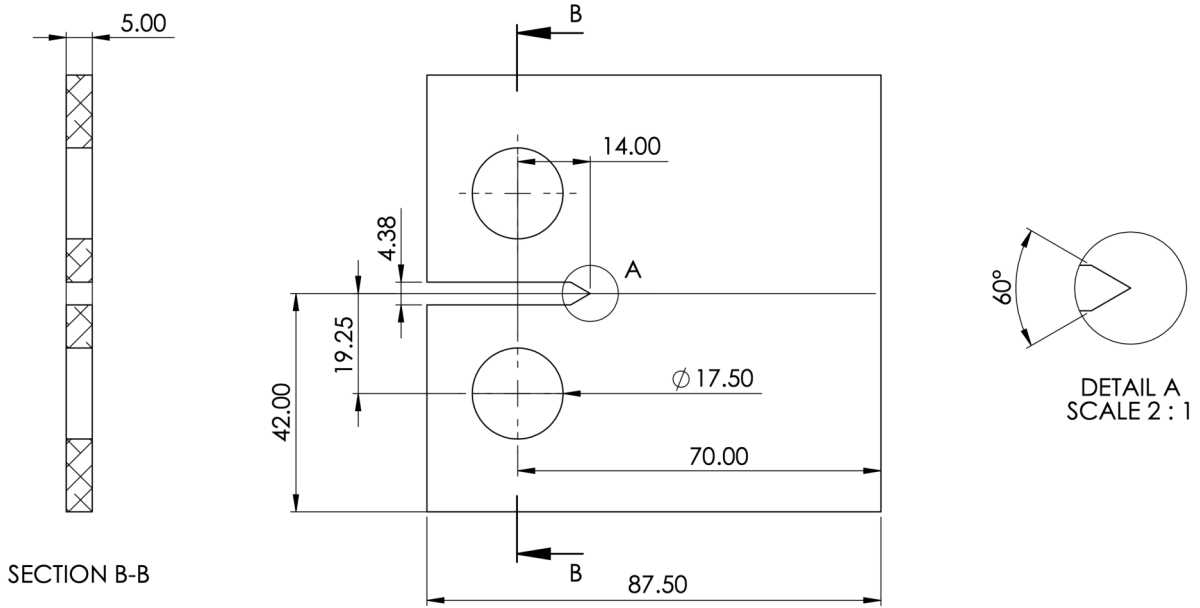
CT specimen drawing according to ASTM E647 standard
